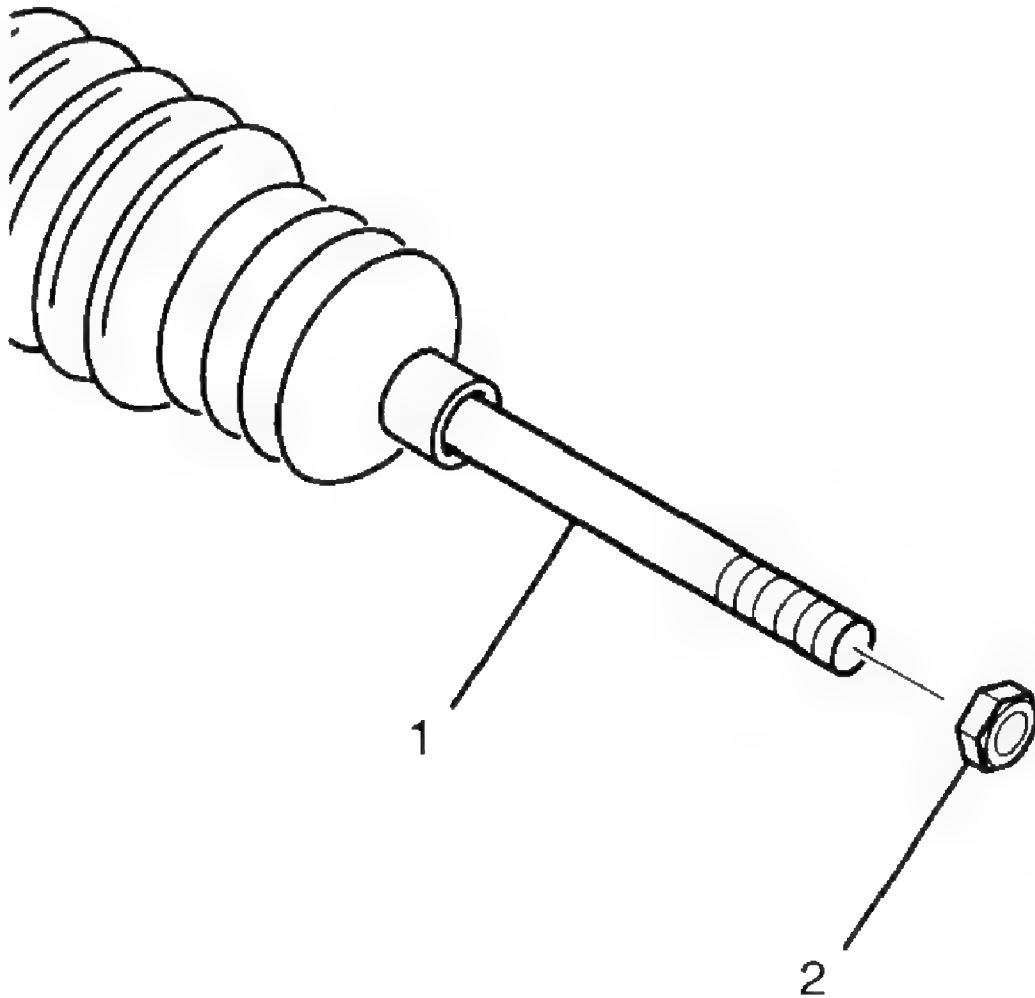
View Of Inner Tie Rod & Hex Jam Nut
